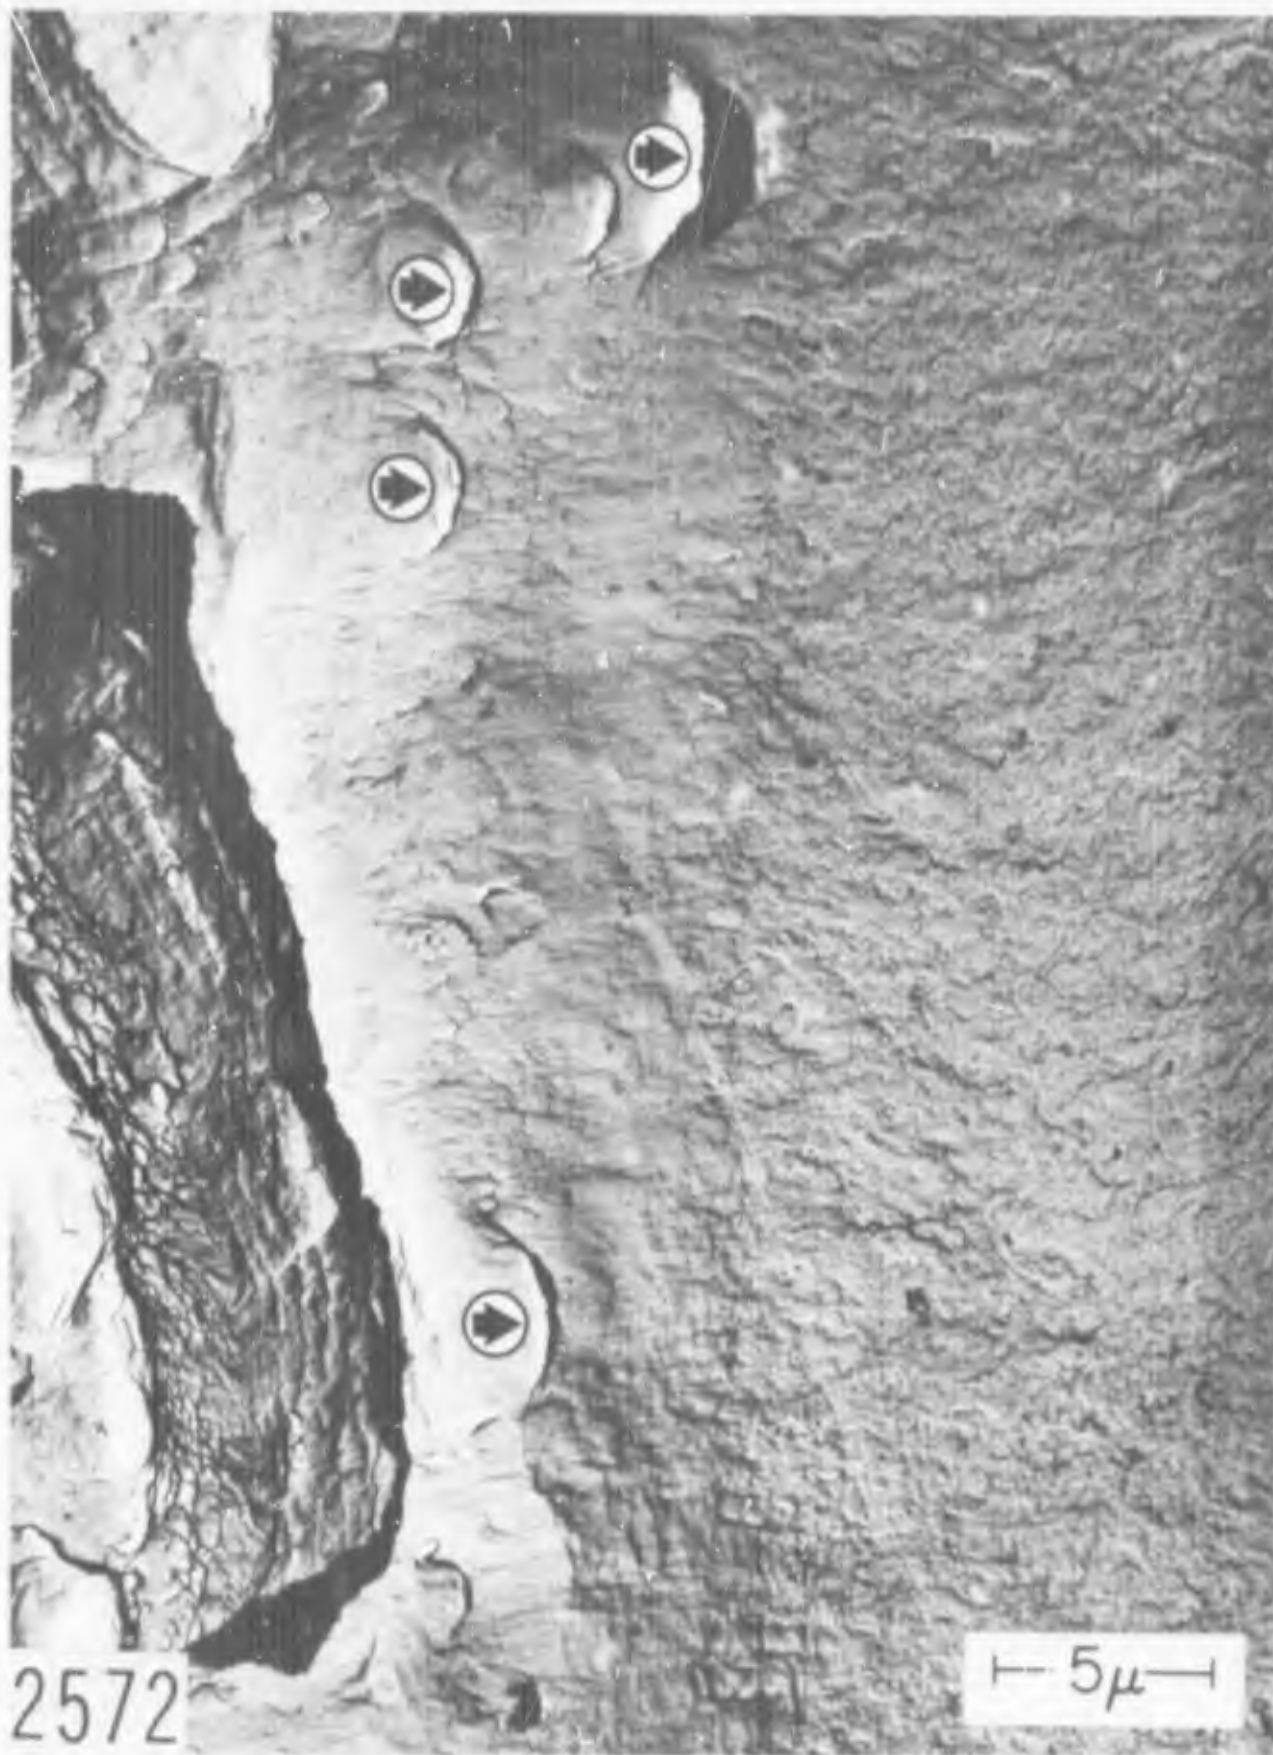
Stretching and tearing (arrows) at the tip of a fatigue crack in a Ti-2.5Al-16V specimen. Fatigue crack is to the right. Palladium-shadowed direct-carbon replica. 6000X.
